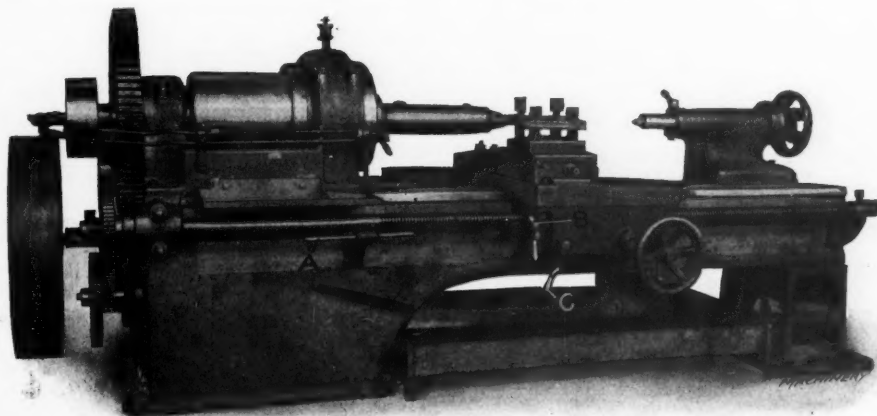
Type of Lathe developed for performing Rough- and Finish-turning Operations on High-explosive Shells
